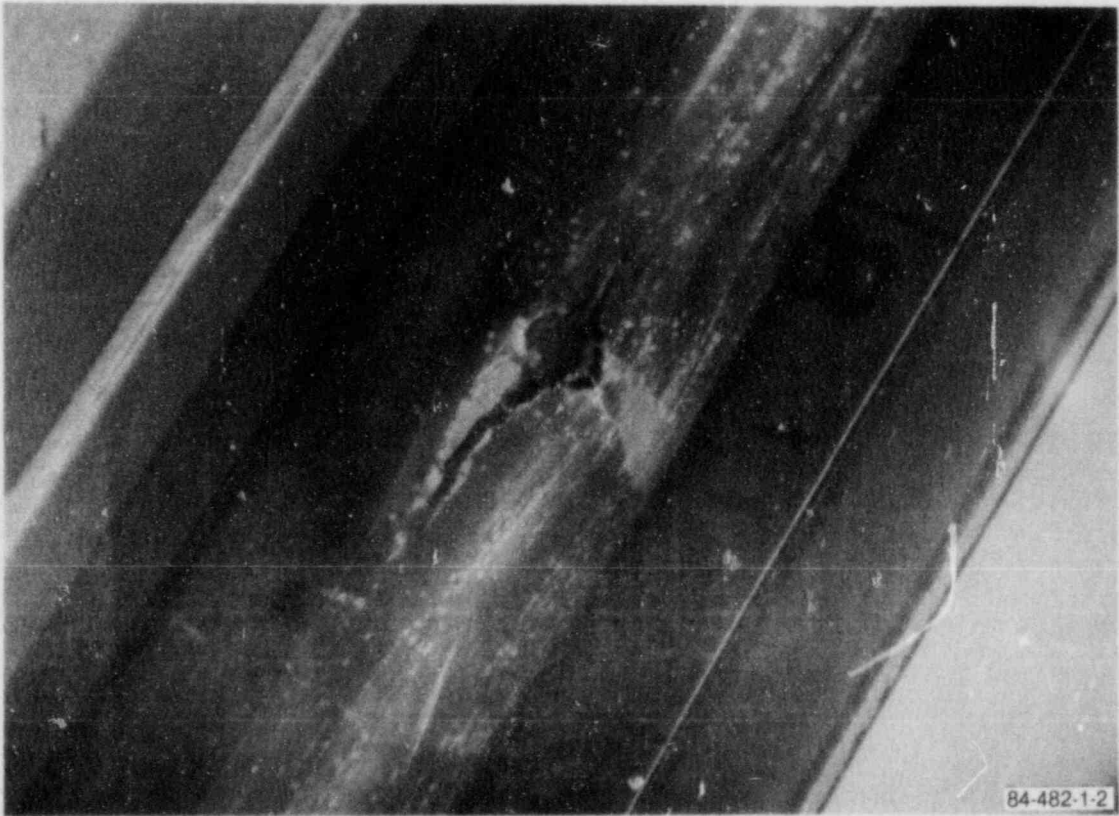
Crack in fuel rod PH462-C5, 401 cm from the top (bottom defect).
